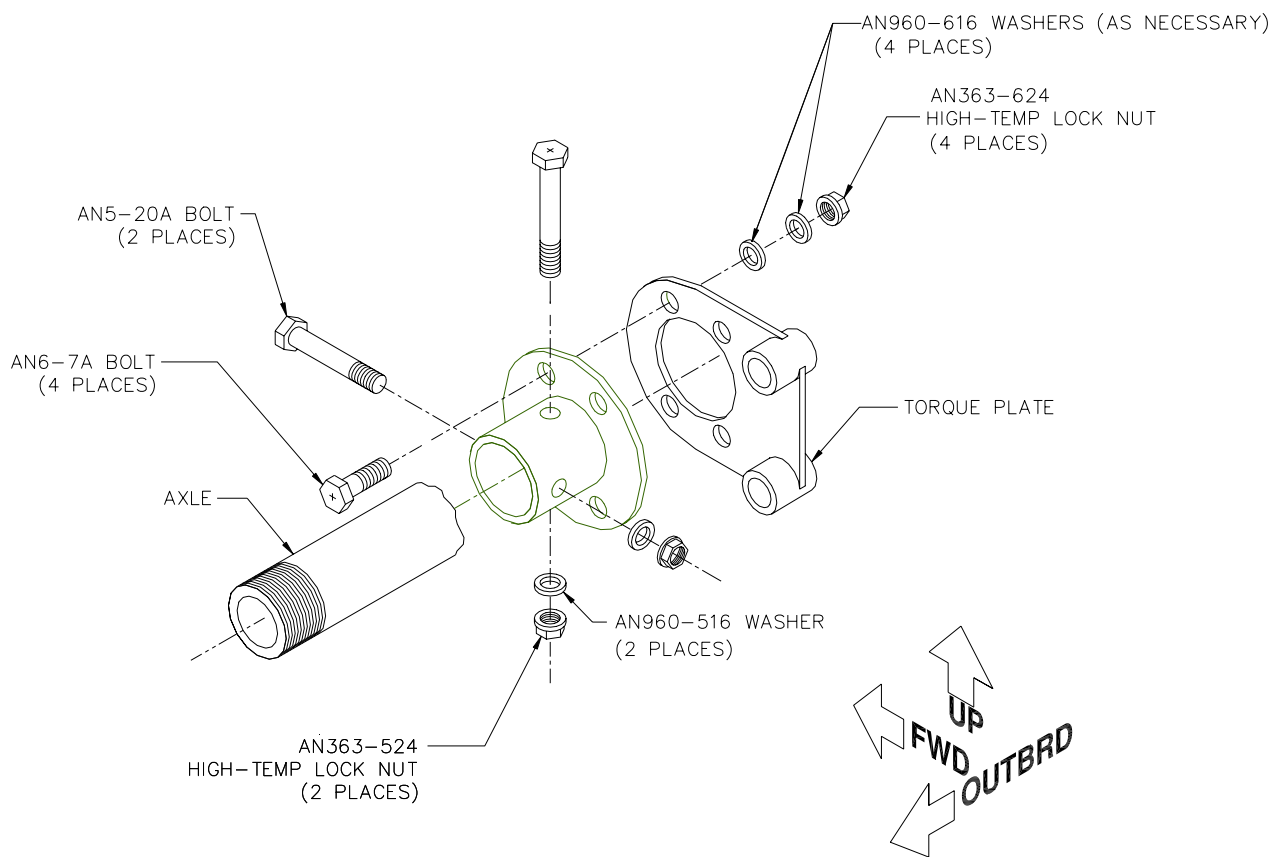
Installing the Brake Torque Plate Without Wheel Pants
